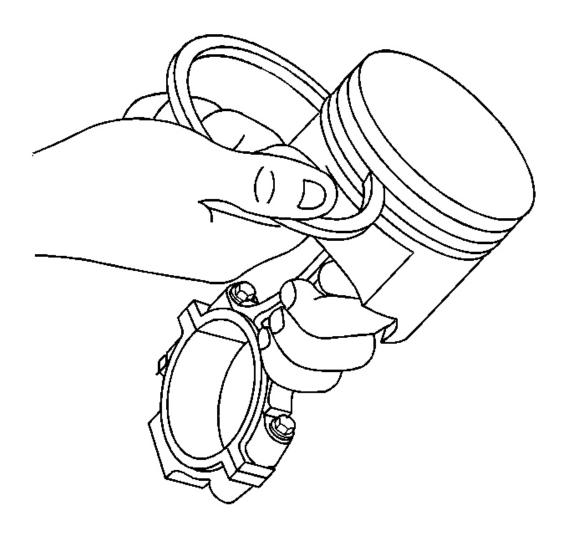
Inserting Piston Ring Into Ring Groove Courtesy of GENERAL MOTORS CORP.
